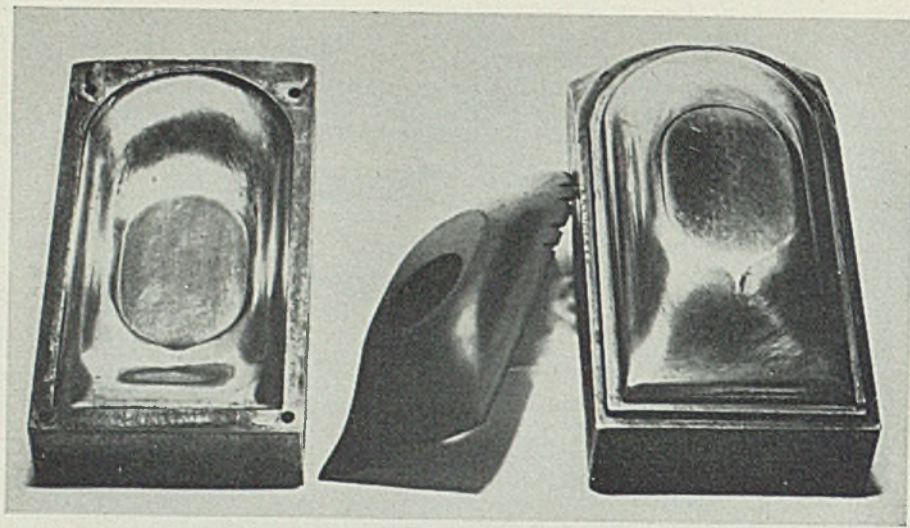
(left to right)—A cavity mold, a rubber steering post pad made in the mold and the master hob from which the mold was made
